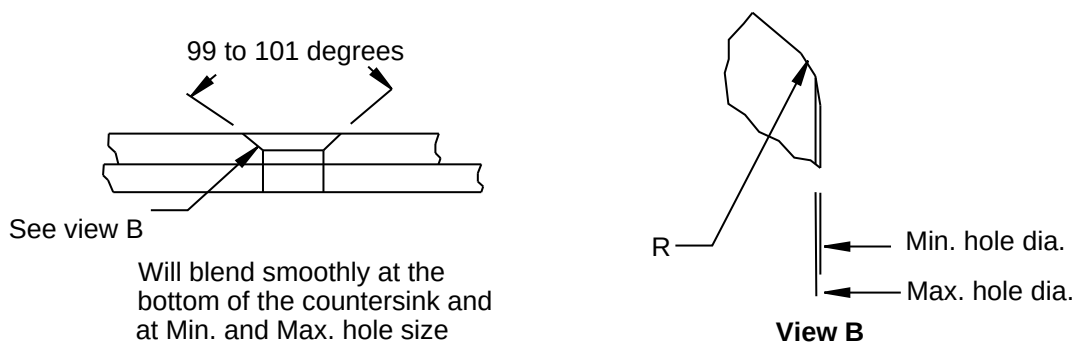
HOLE AND COUNTERSINK FOR FLUSH HEAD FASTENER
